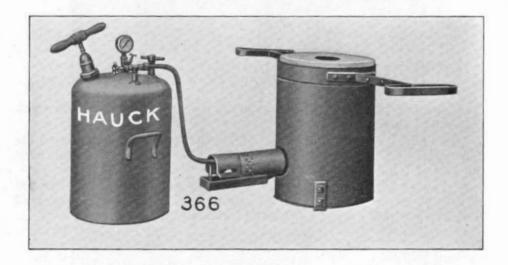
Hauck Crucible Melting Furnace with vaporizing type kerosene burner with hand pump in tank, all complete and ready for use.
